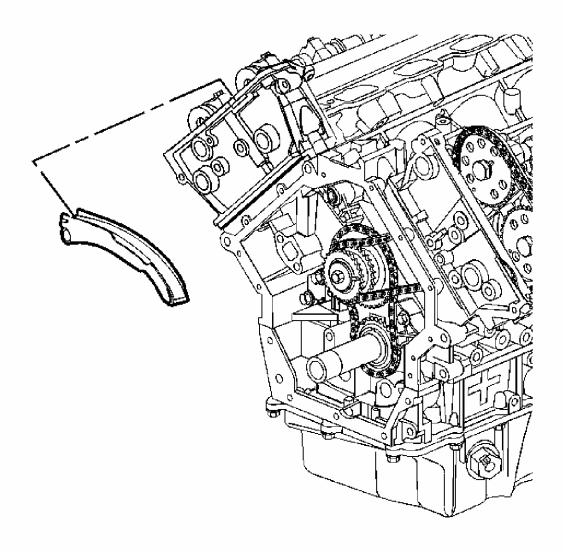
View of Right Secondary Camshaft Drive Chain Shoe Courtesy of GENERAL MOTORS CORP.
